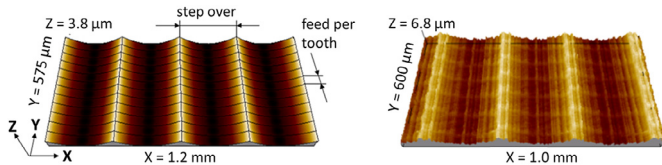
Ball end milled surface generated with tool diameter 6 mm, step over 300 μm , feed per tooth 48 μm . Left: simulated kinematic surface topography. Right: measured surface [32].
